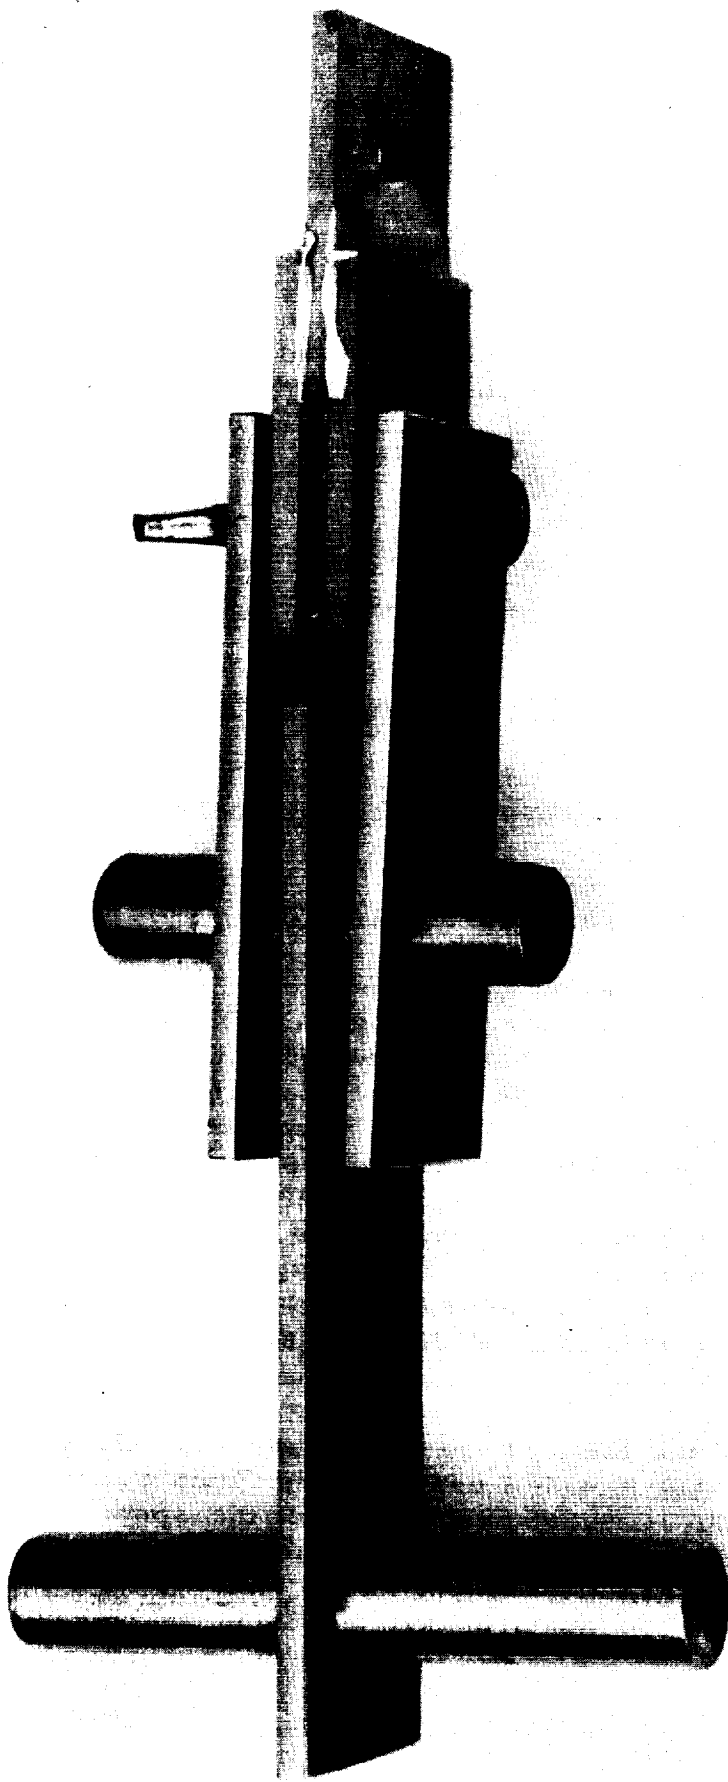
TEST FIXTURE AND ADHESIVE BONDED SPECIMEN
